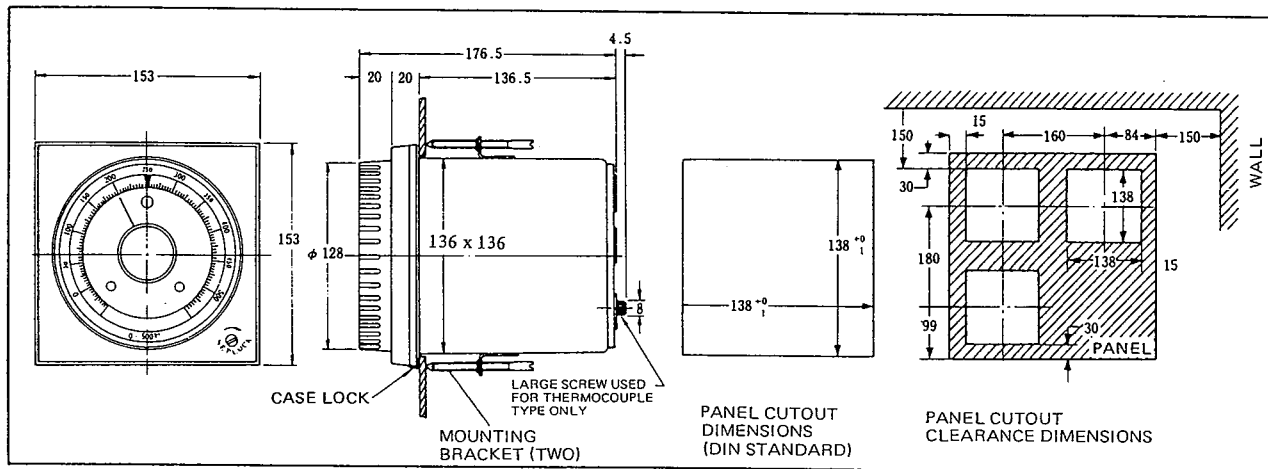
External dimensions, panel cutout and panel cutout clearance dimensions
